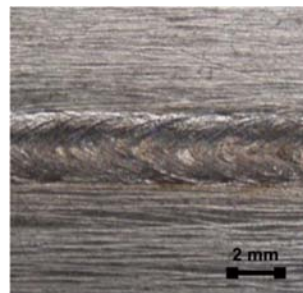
The weld top surface for the laser welding with laser power of 2000 W and welding speed of 2 m/min
